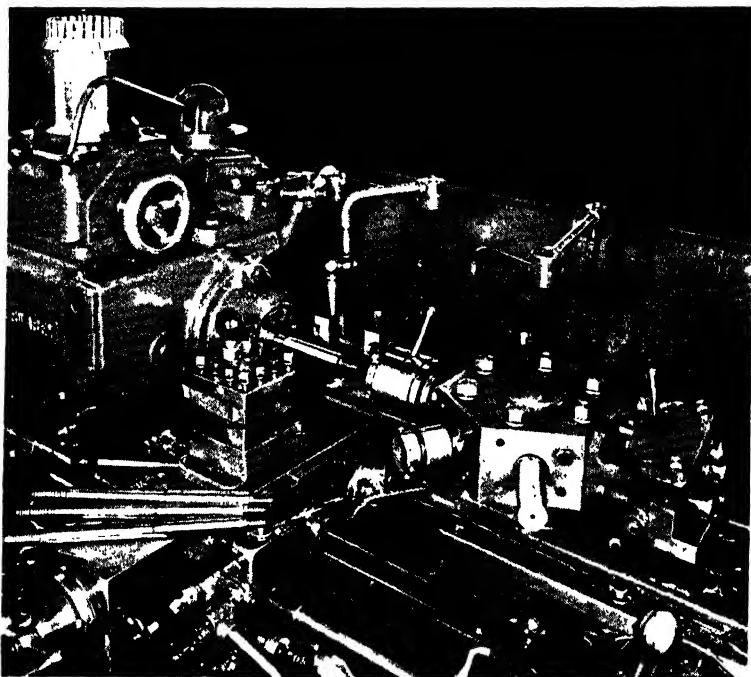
Threaded Shafts for Anti-aircraft Guns are Produced from Hard Manganese Bar Stock in Turret Lathe Shown
